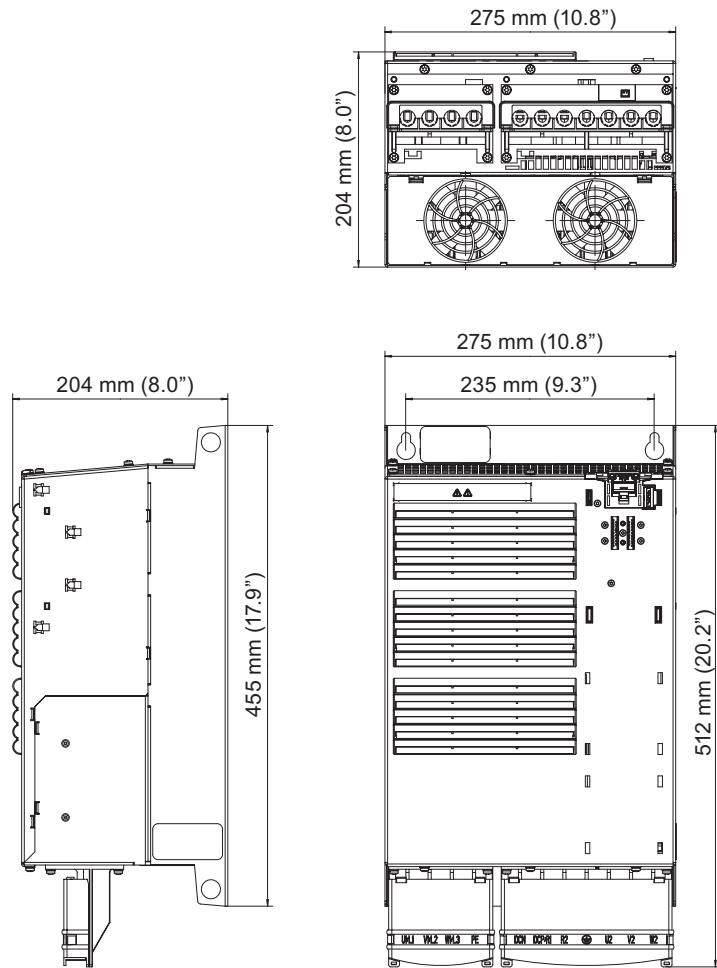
Dimensional drawing PM250 FSD, 400V (filtered)
